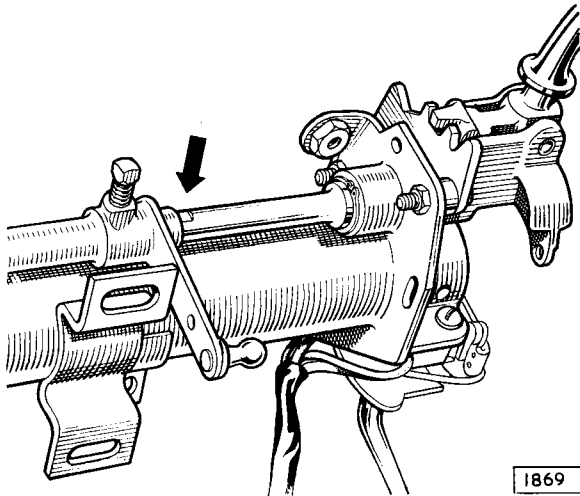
Align the flat on the end of the upper control shaft with the securing screw on the control lever.
